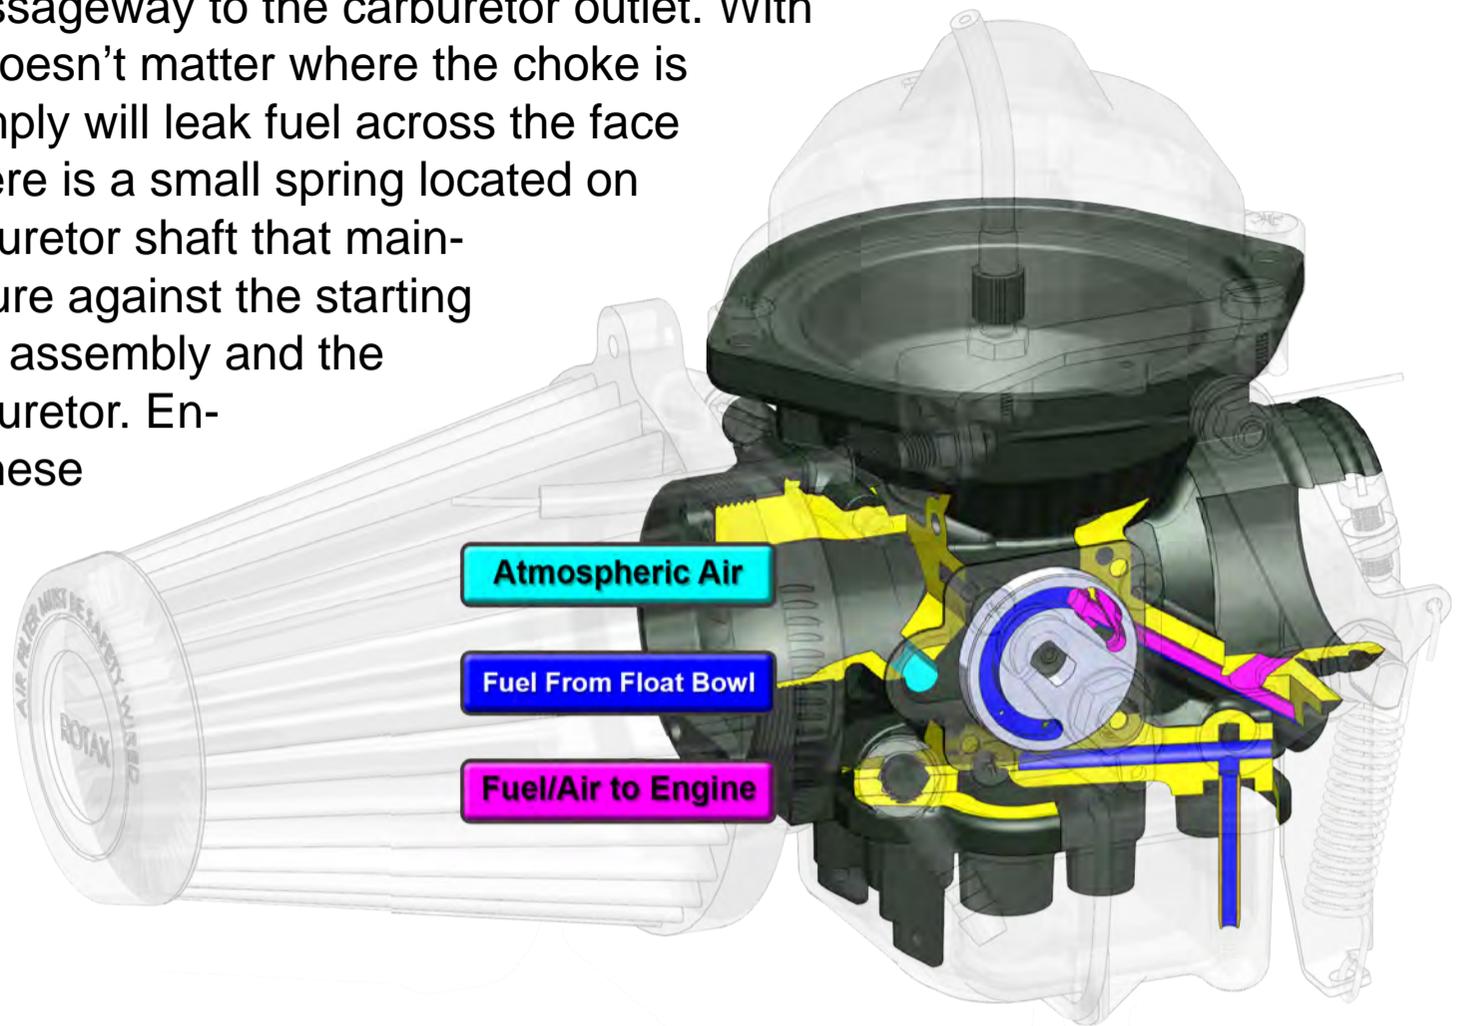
Cutaway of the Passageways that make up the Starting Carburetor
